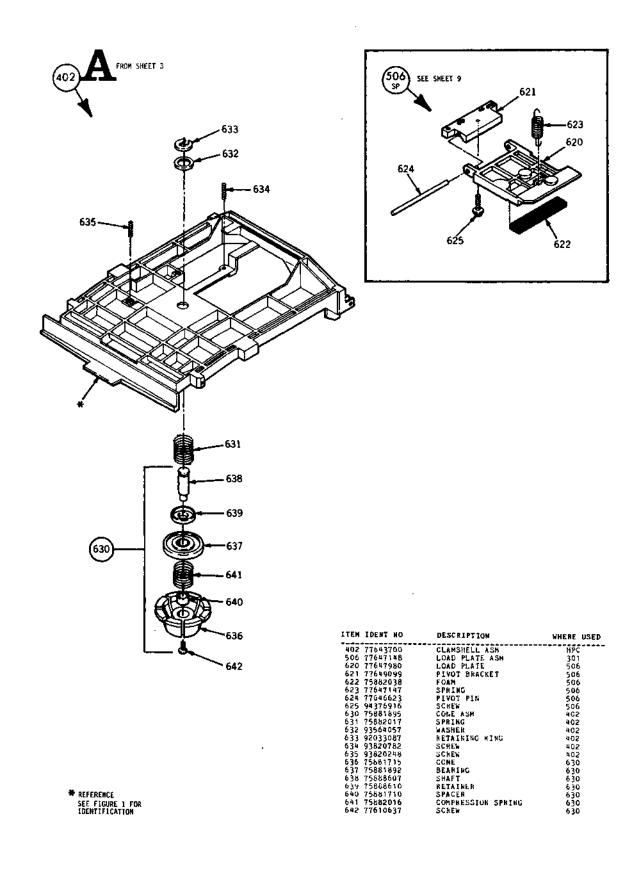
CLAMSHELL AND LOAD PLATE ASSEMBLIES
